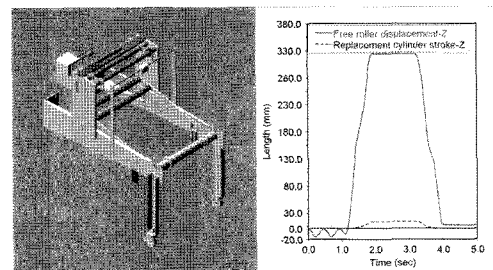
Mechanism simulation of package-bag supply adjusting device
